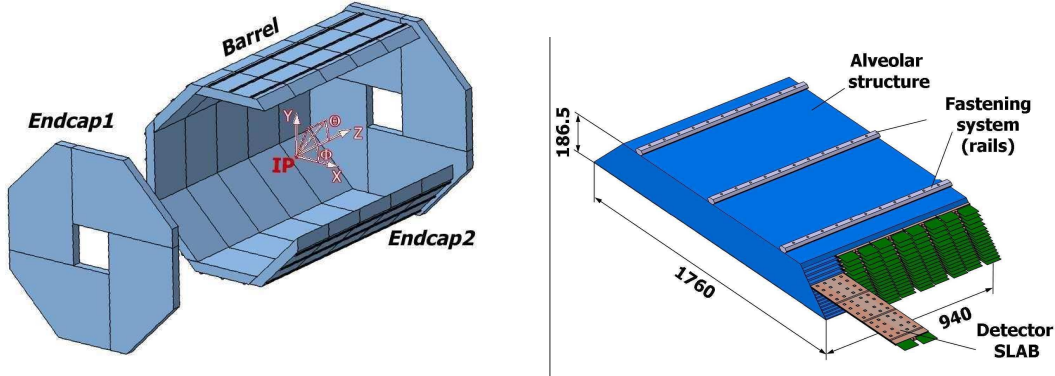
Global layout of the ECAL (left) and layout of one module (right).
